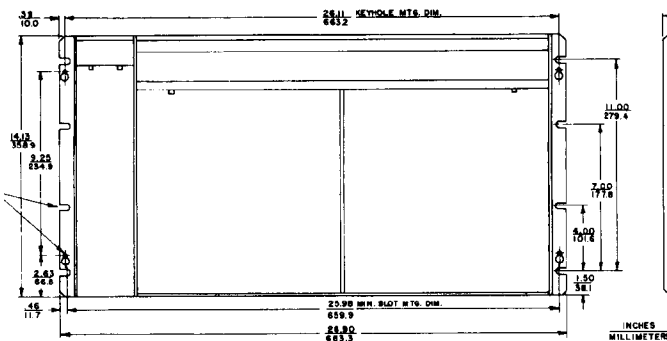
Type HRK200 Rack Assembly Mounting Dimensions
